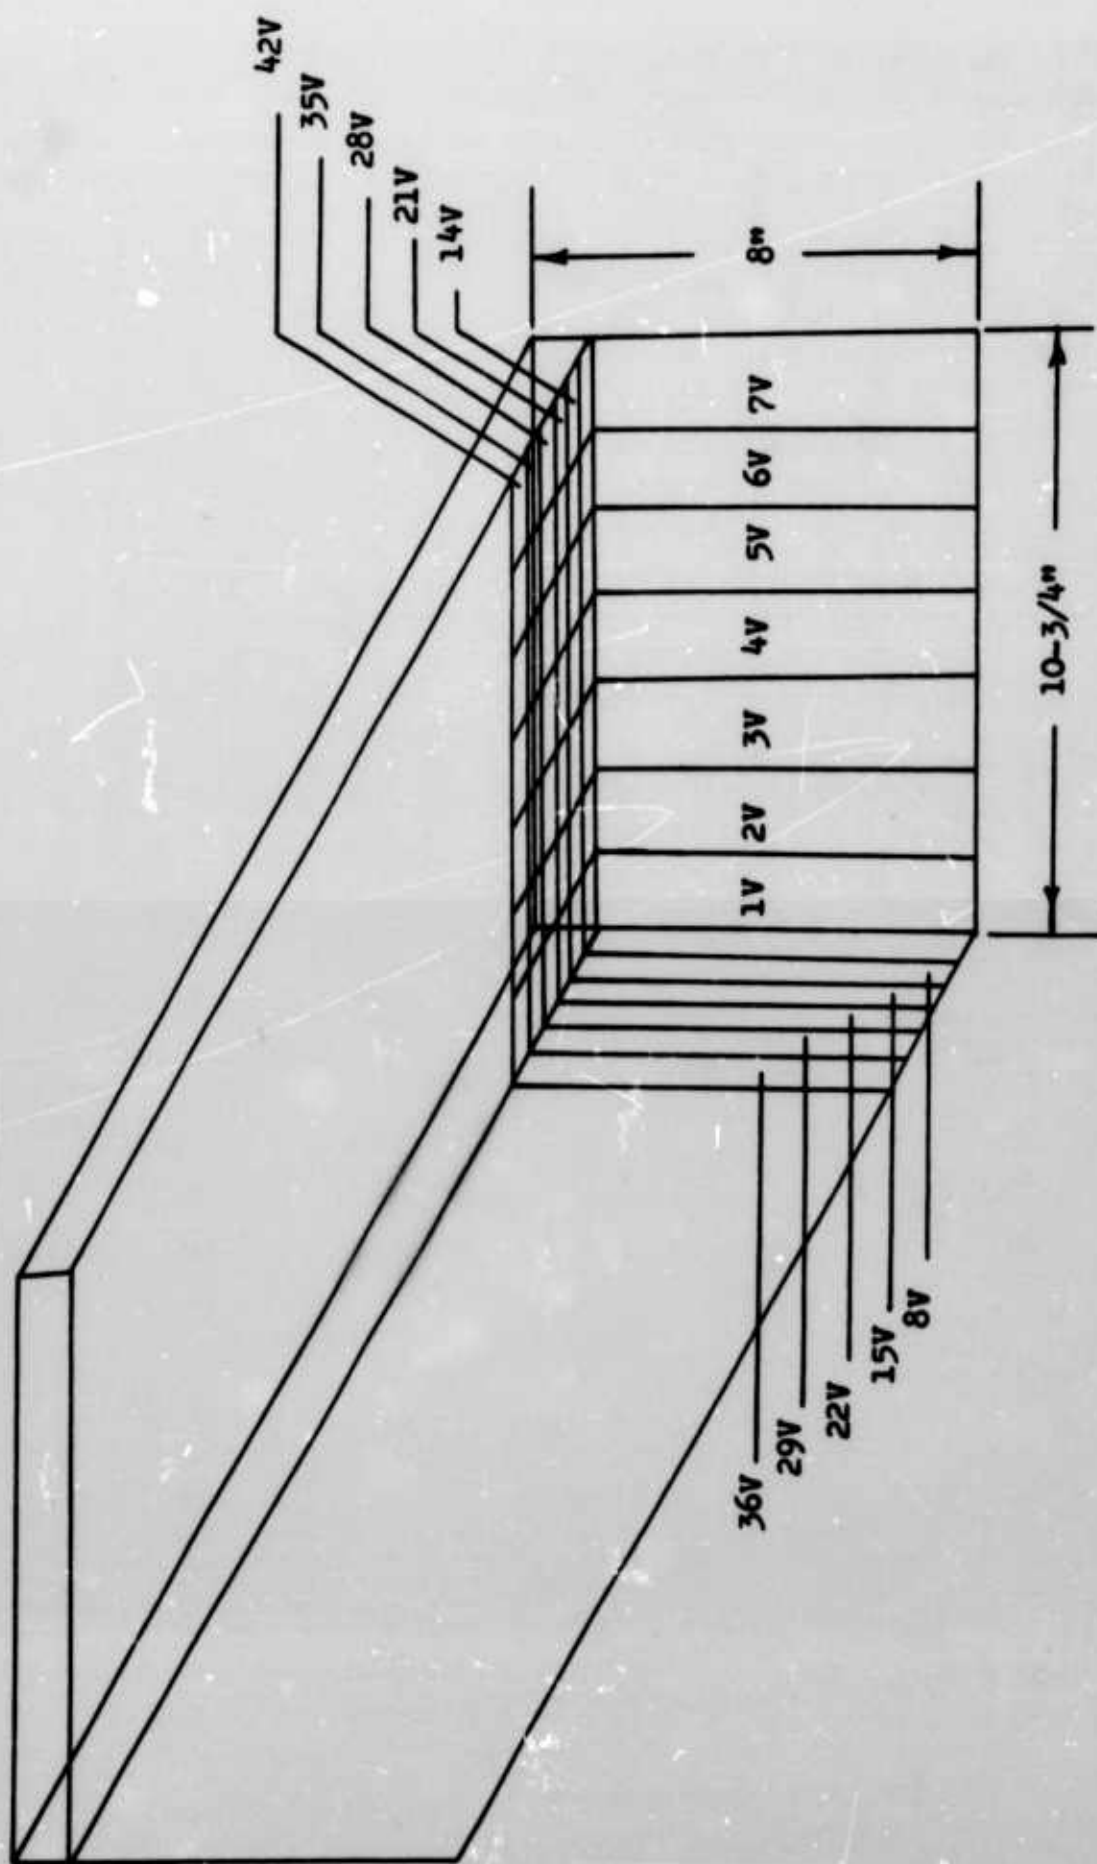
U-Bend Specimen Locations in H-11 (Billet V)
